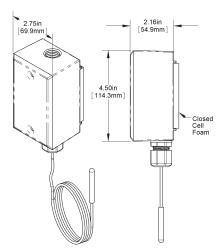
Remote Probe in a Weatherproof (WP) Enclosure
